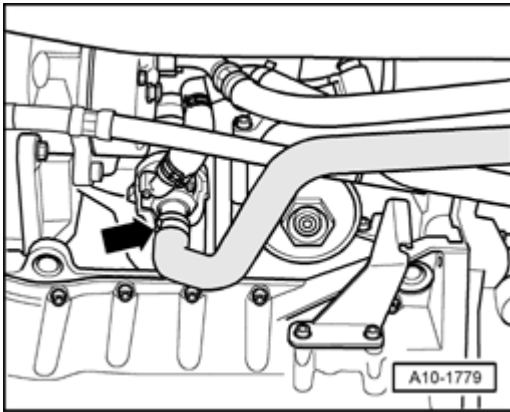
Removing/Installing Lower Coolant Hose At After-Run Coolant Pump -V51-
